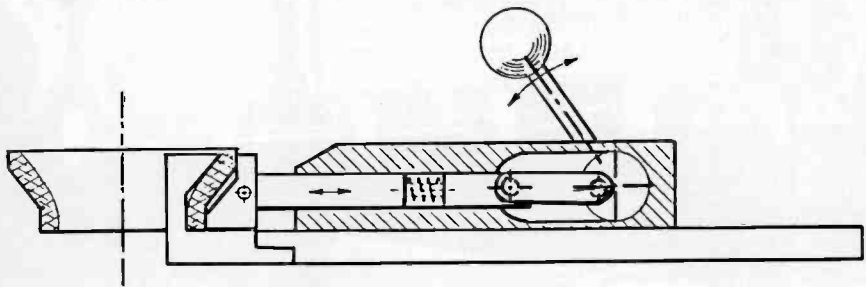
Cradle-mounted flyer for winding toroidal coils.
